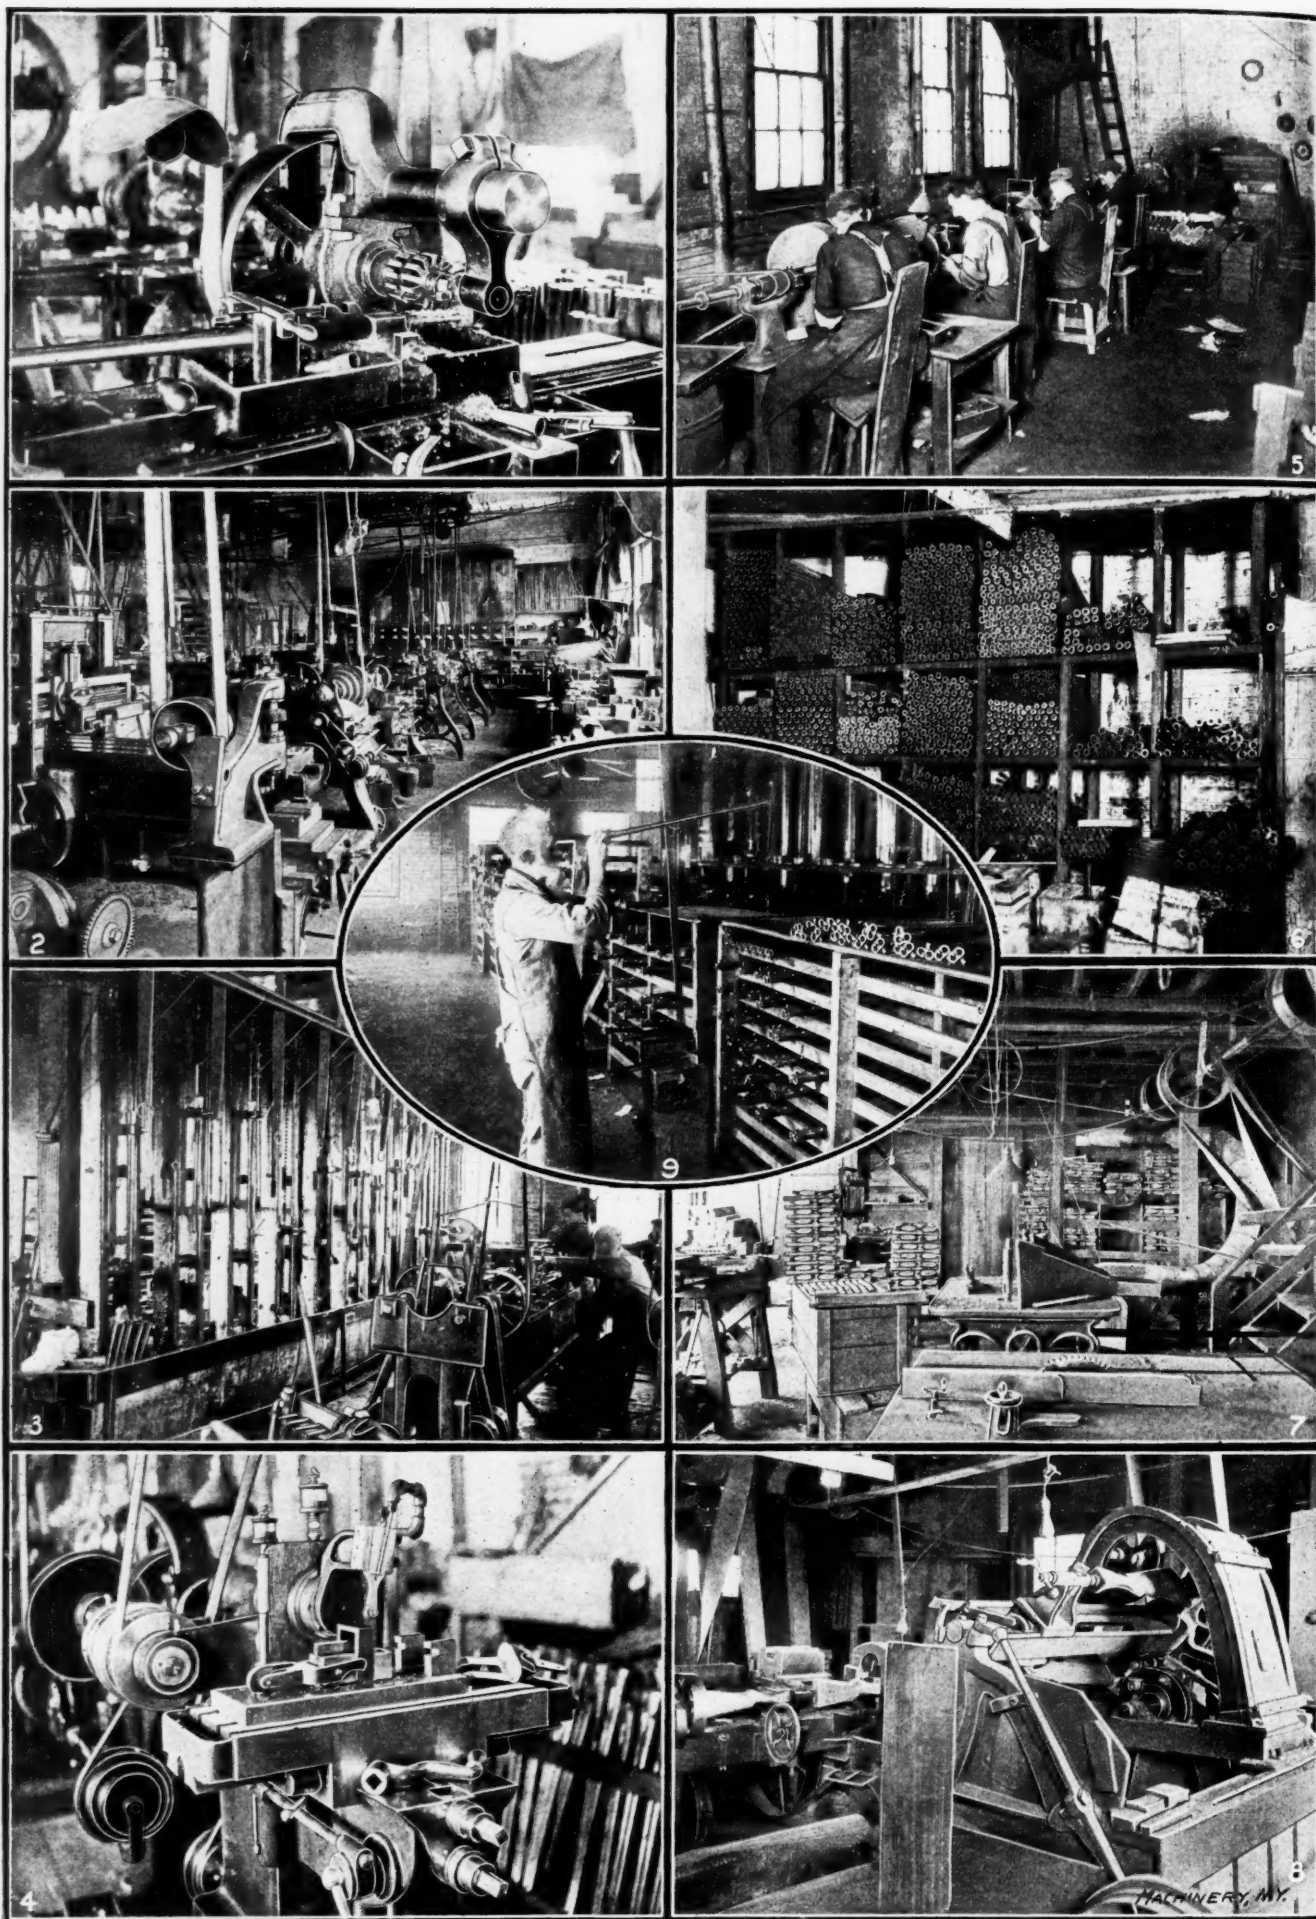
Taking Straddle Cut on Lug in Milling Machine.
